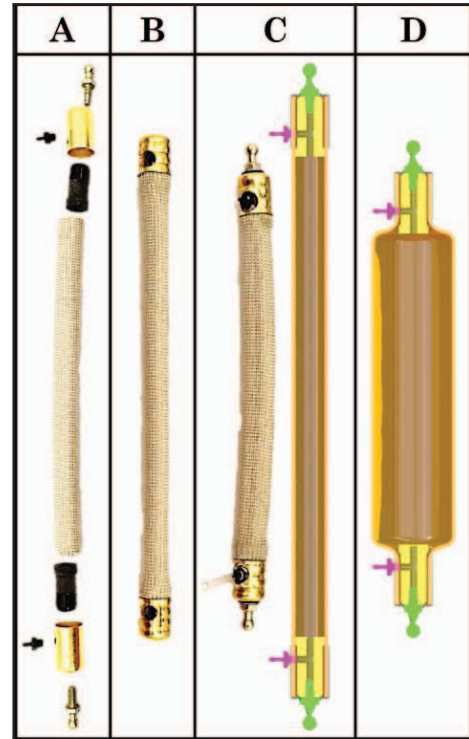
PAM design and assembly detail: (A) Individual components; The muscle tube, inserts, ferrules, fittings and ball joints. (B) PAM after the inserts have been fit and the ferrules swaged and drilled. (C) Final PAM with fittings and ball joints & CAD cross-section for detail. (D) CAD cross-section of the inflated PAM.
